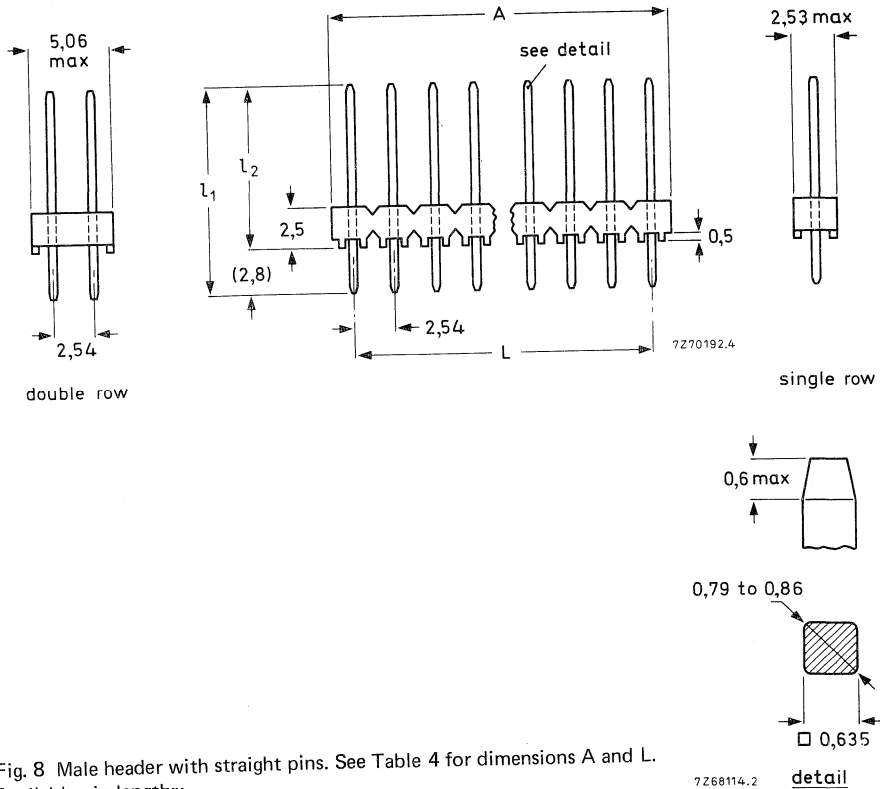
Male header with straight pins. See Table 4 for dimensions A and L.
